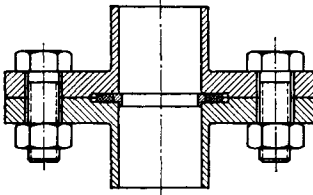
Unit flange connection (2 flanges with pipe connection and bearing ring with O-ring seal).
